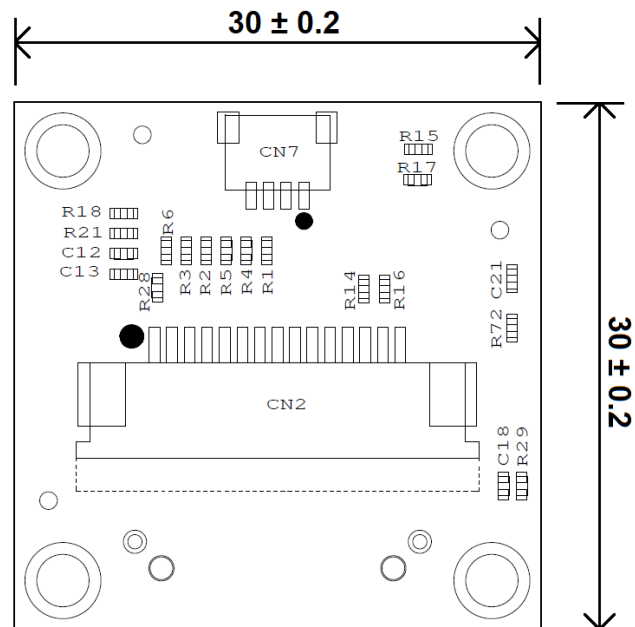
Rear View of e-CAM24_CUNX Adaptor Board Mechanical Dimensions
